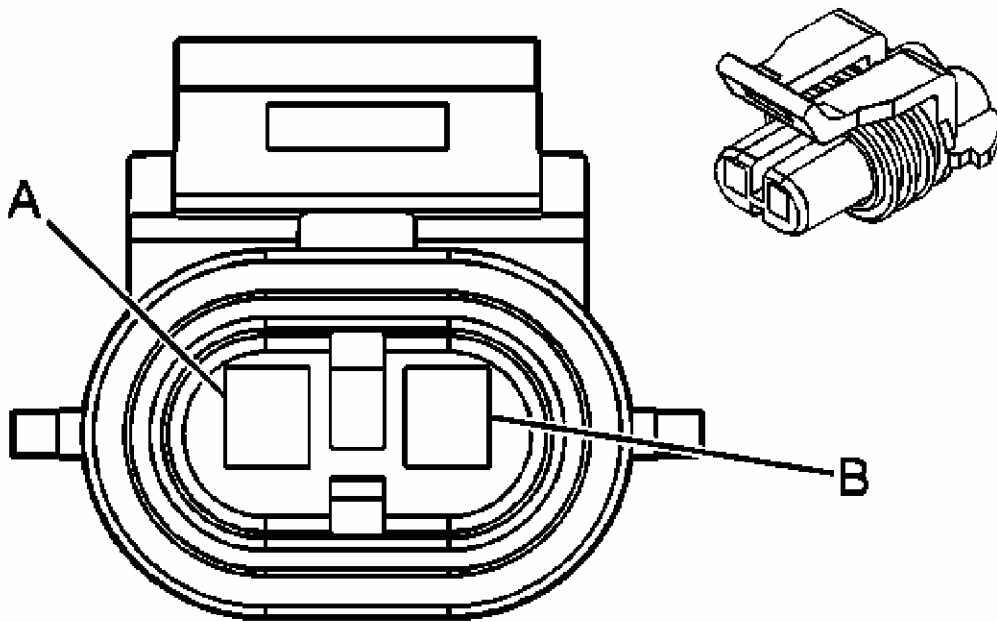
Sliding Door Detent Switch - (E58/E59) Connector End View
